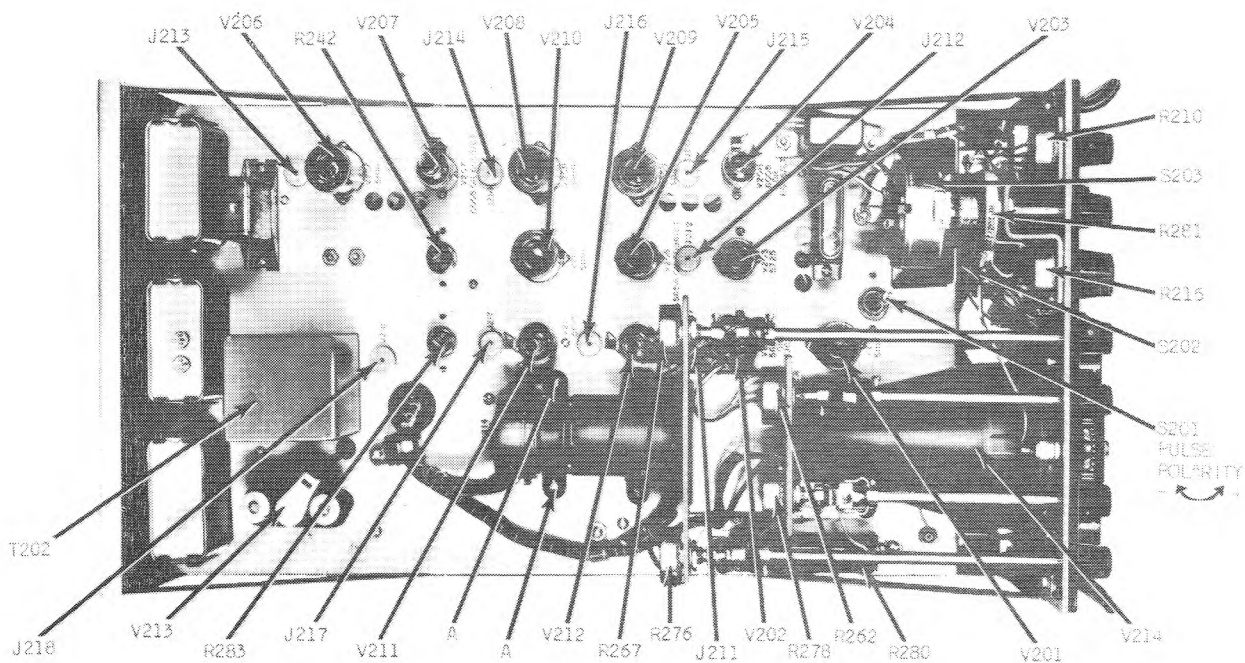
Azimuth Indicator IP-243/ALA-6, Top View of Chassis
